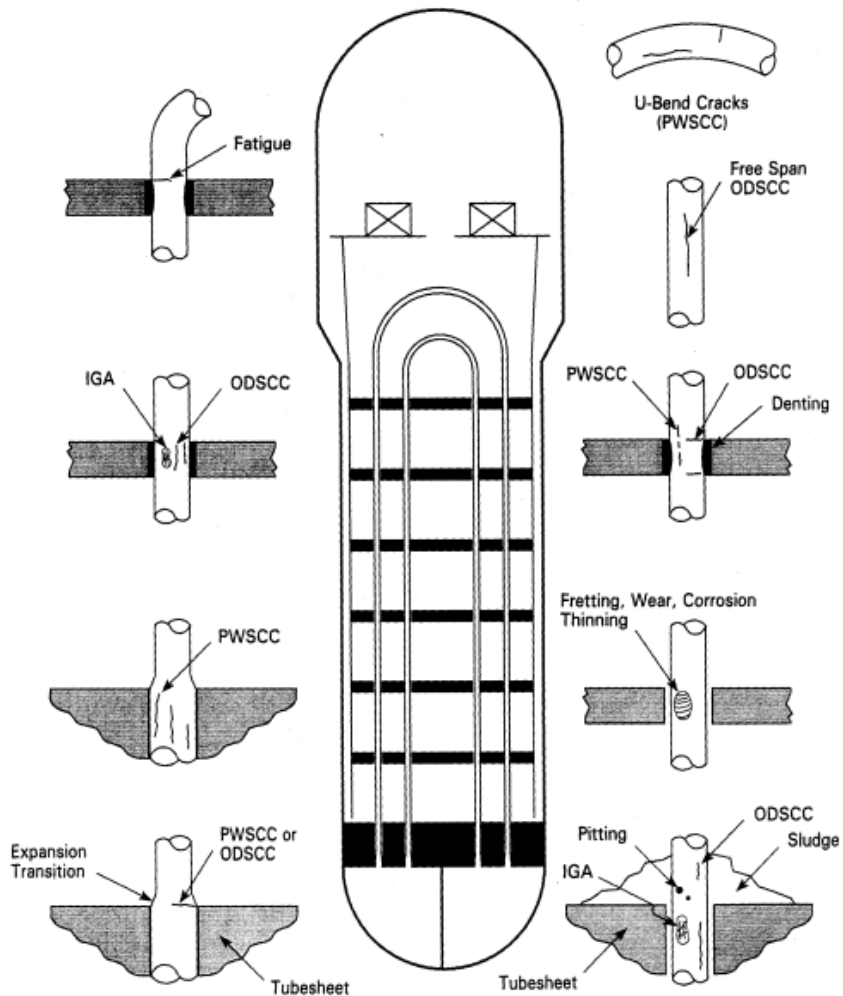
Schematic of RSG tube degradation mechanisms [30]
